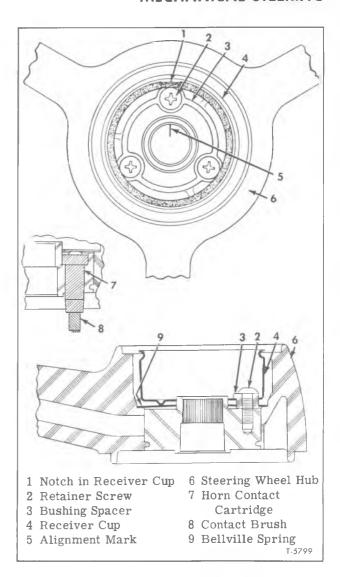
Horn Assembly Components (Cowl and Conventional Cab)
